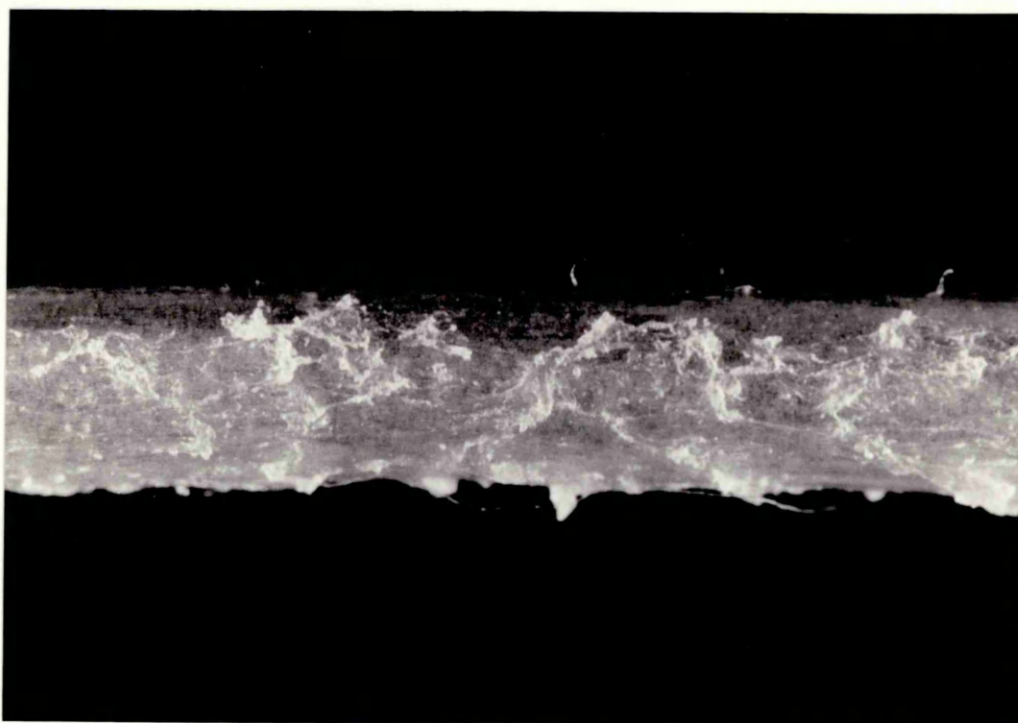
SHARKSKIN ON MILD STEEL WIRE COATING
